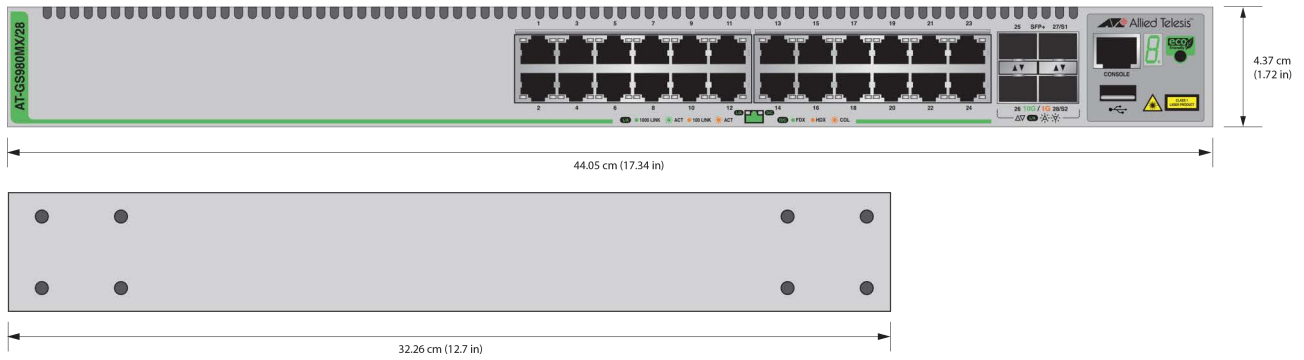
Dimensions of the AT-GS980MX/28 Switch
